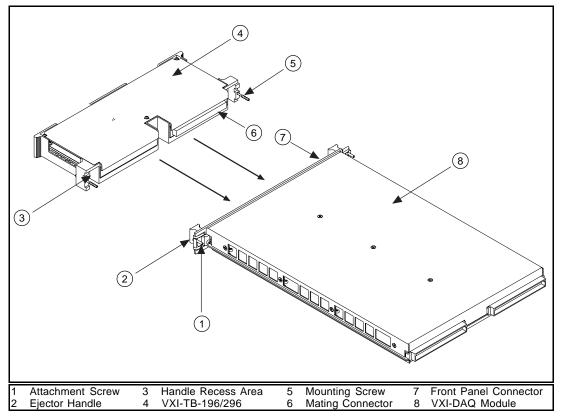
Installing the Terminal Block on the VXI-DAQ Module
